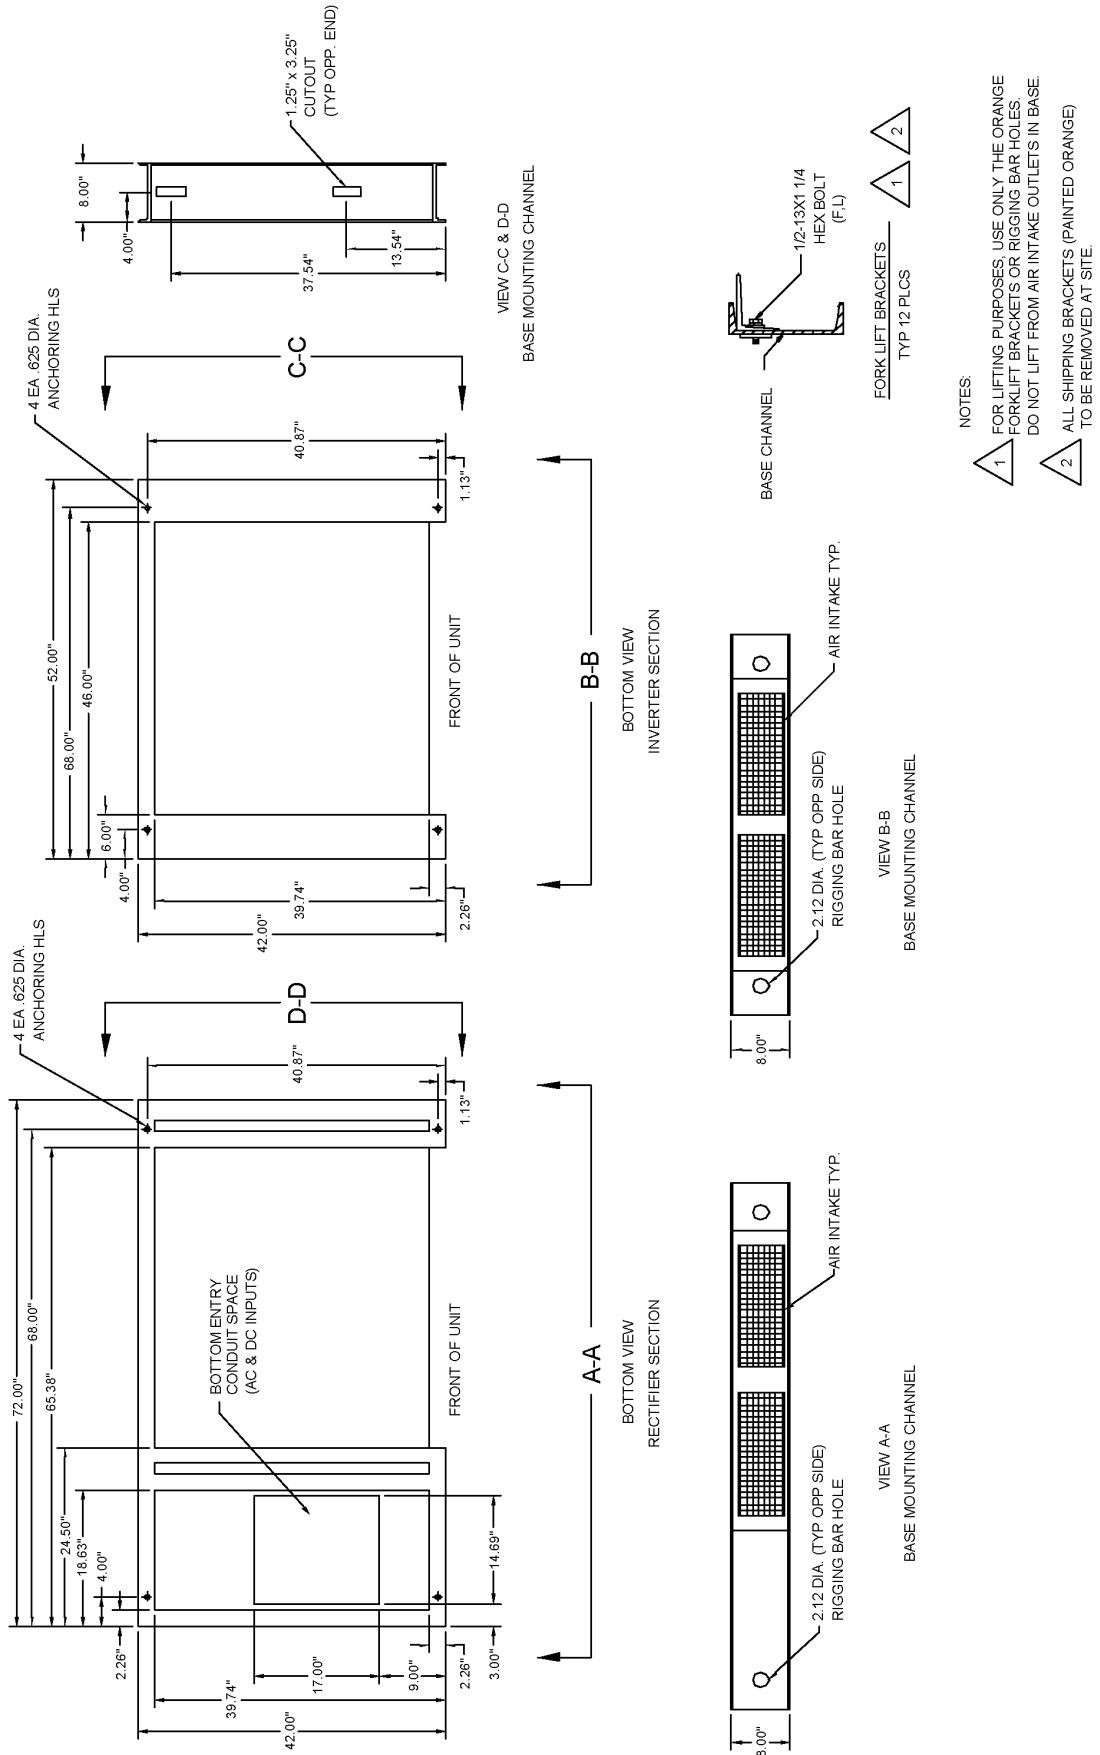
Outline drawing, 1000kVA, front-access Multi-Module UPS, 480V and 600V
